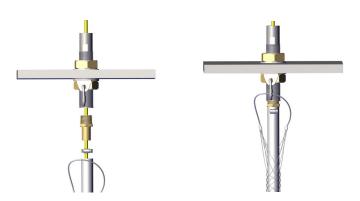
Step 7 Attach Interior Hose to Penetration Assembly
